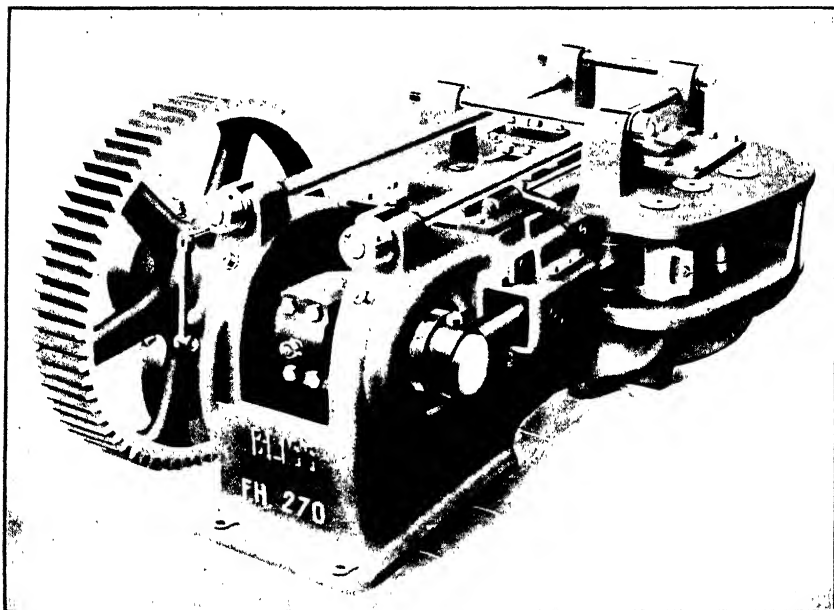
A typical forging machine, principally for small steel parts produced from bar stock.
